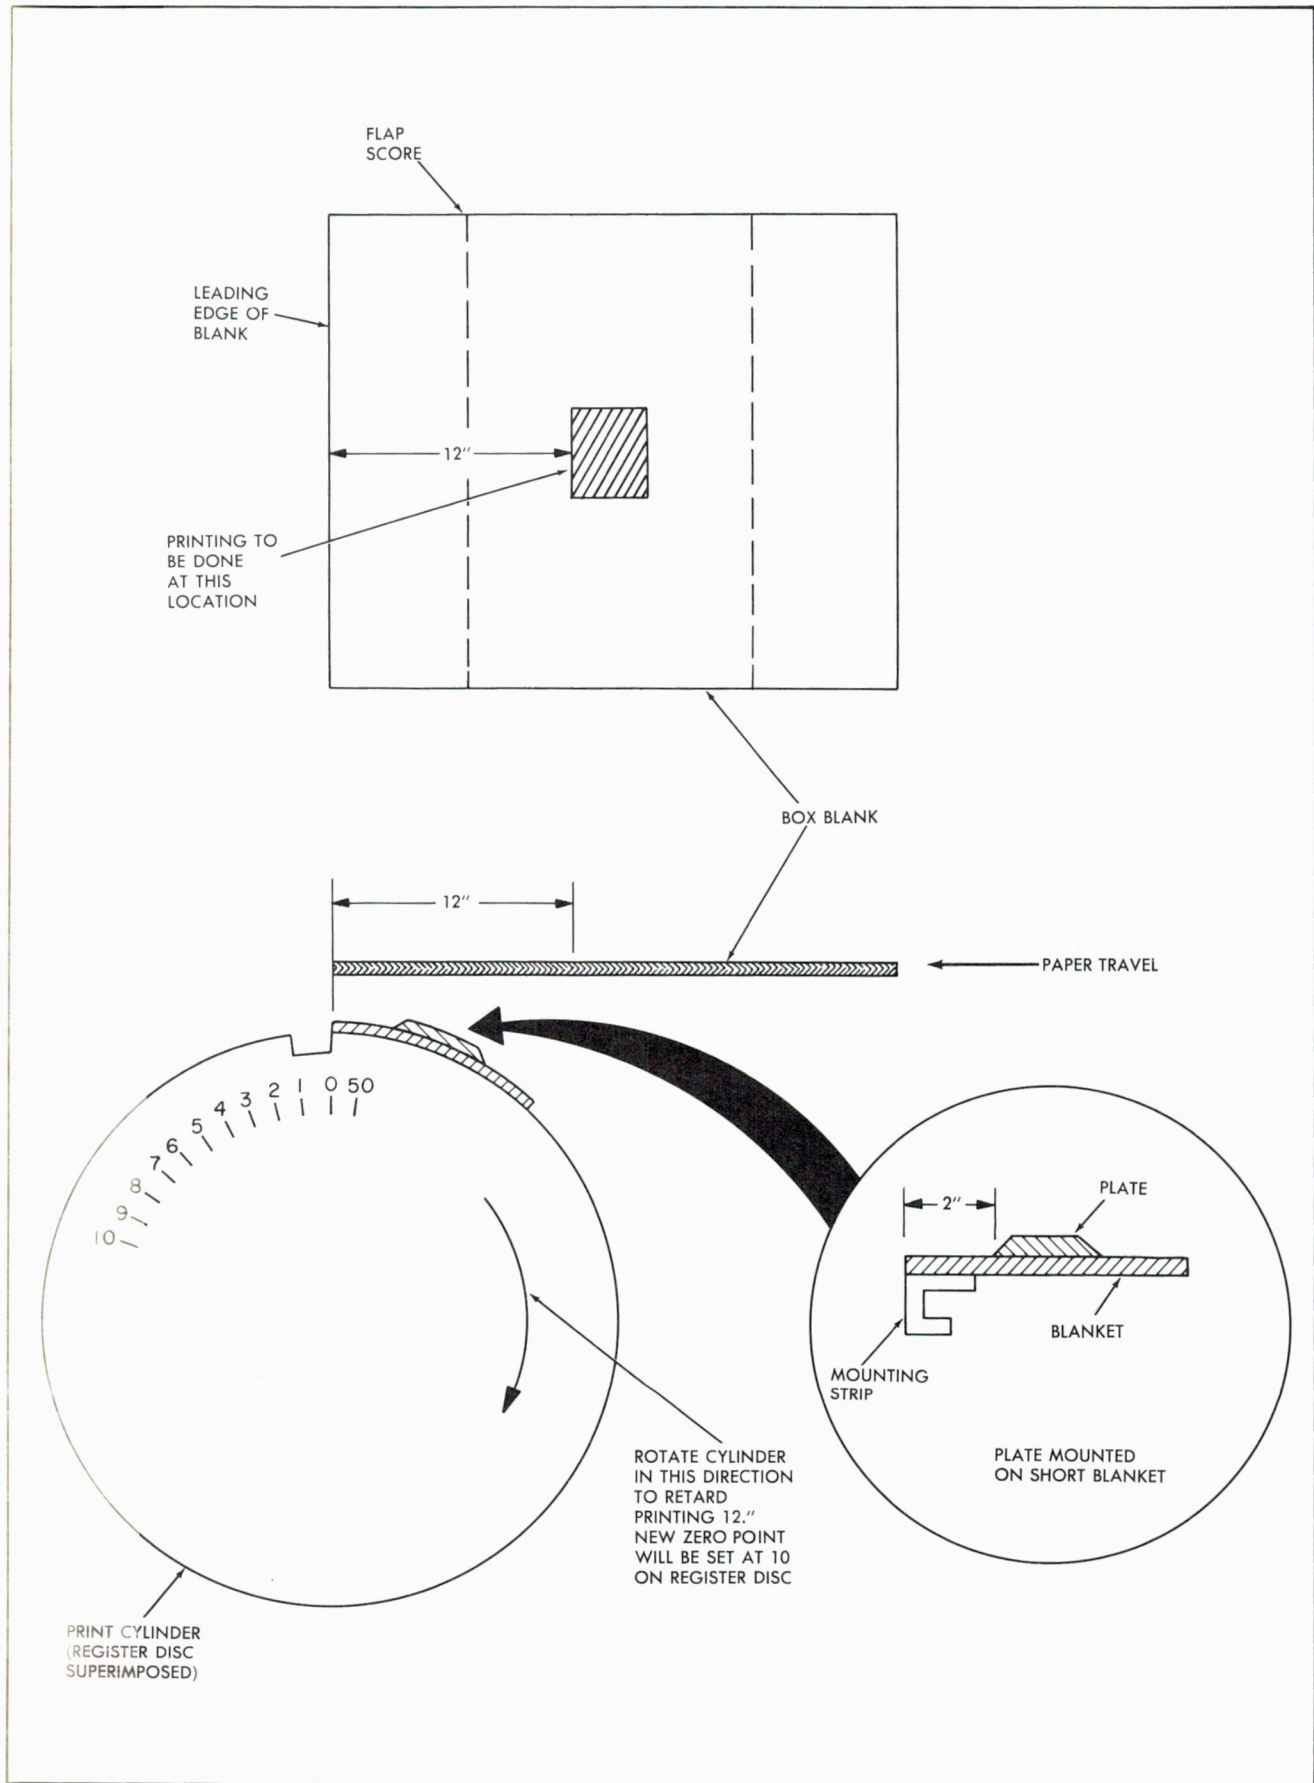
Example of Mounting Short Printing Plate Blanket
